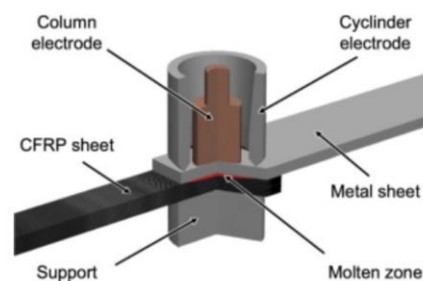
Resistance spot welding and adhesive bonding (RSW-AB) [11]
